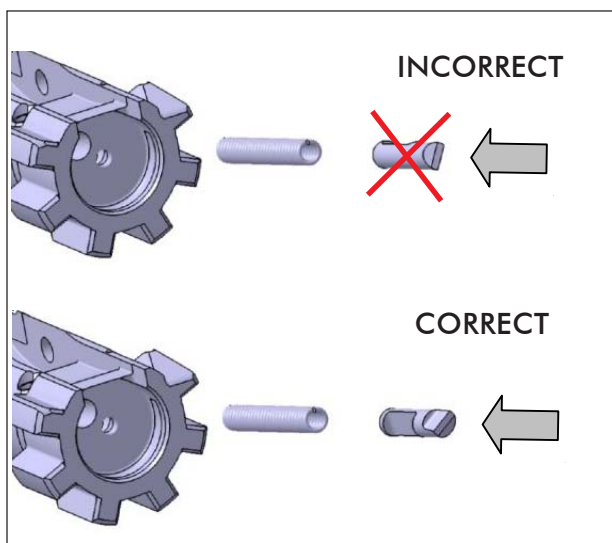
i - Reassembly of the spring, ejector (465) and the ejector (464)
